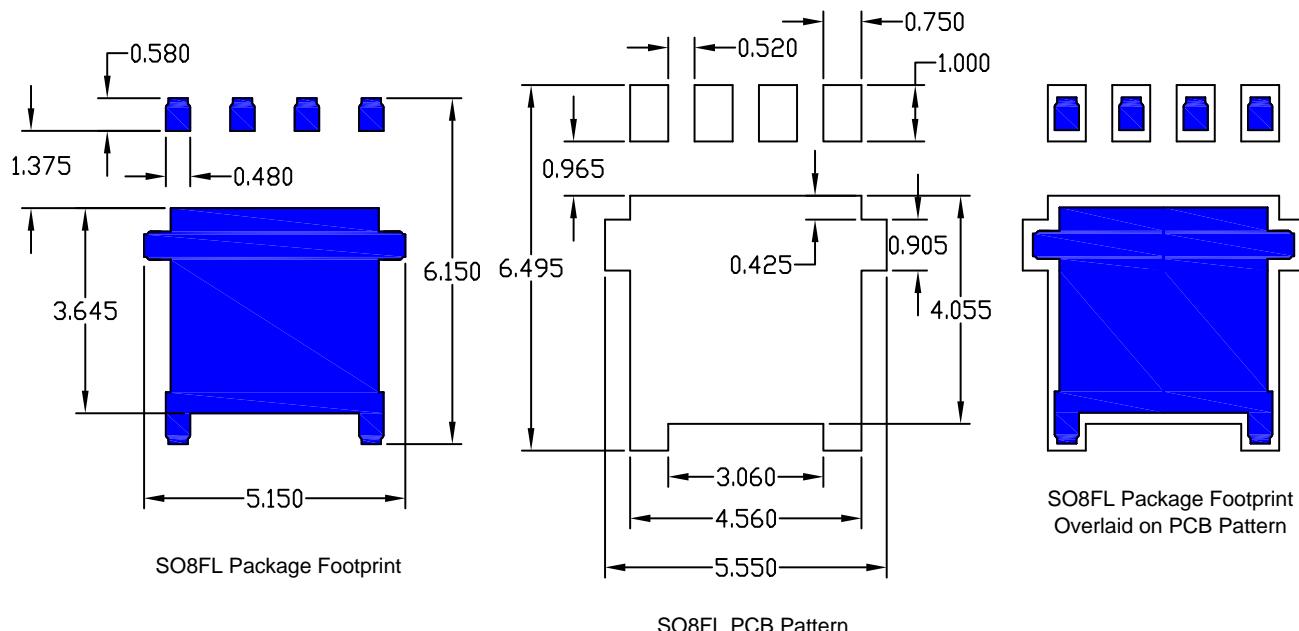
Printed Circuit Board Layout Using Non-solder Masked Defined I/O Pads
